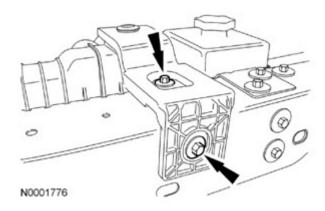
Locating Radiator Support Brackets Bolts Courtesy of FORD MOTOR CO.
